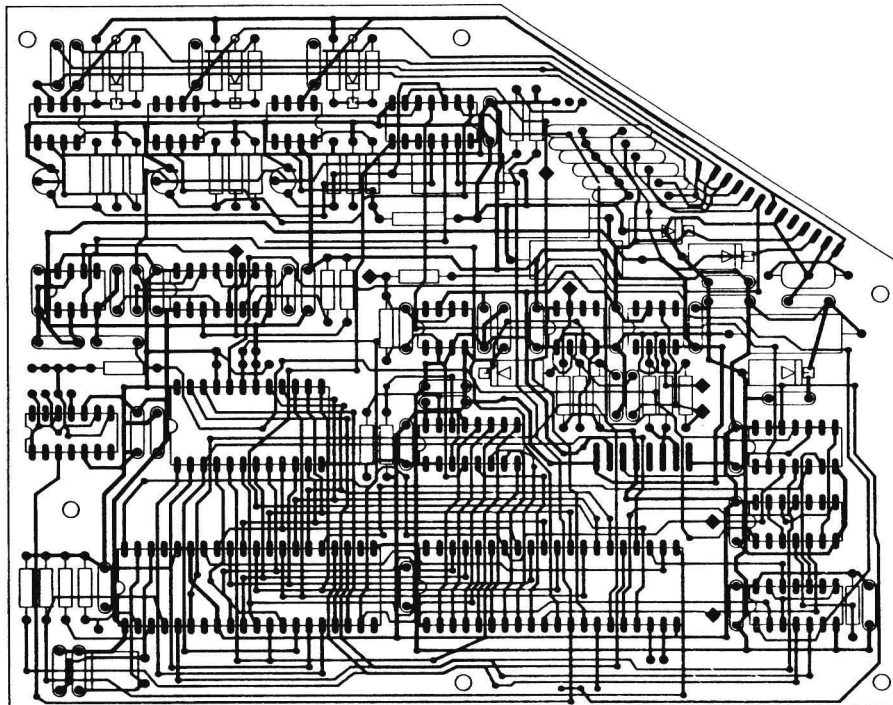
AutoCAD-produced electrical drawing (Courtesy of CAD Northwest Inc.).
